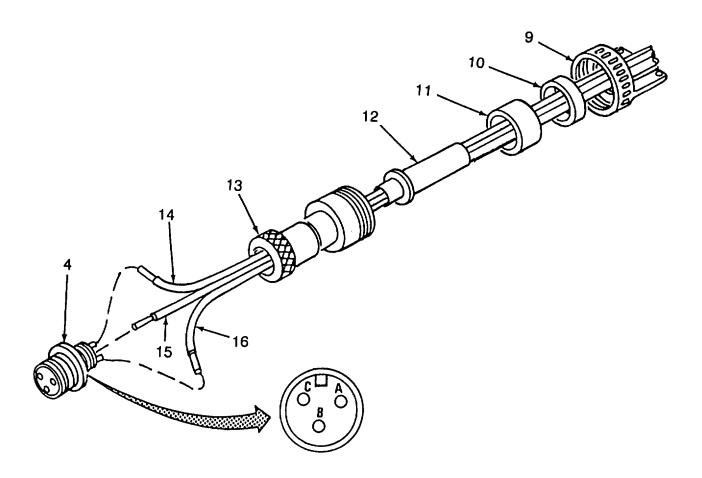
Power Cable Adapter Cord Repair (Sheet 2 of 3)
